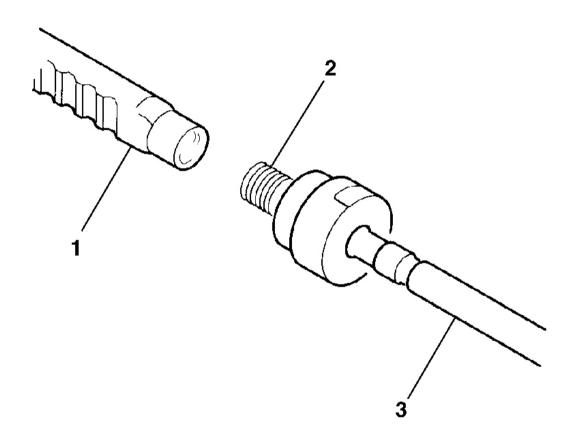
Rack, Inner Tie Rod & Threads Courtesy of GENERAL MOTORS CORP.
